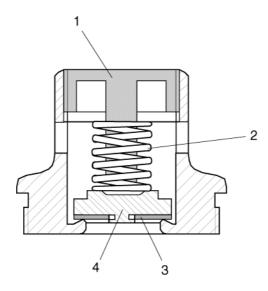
Sectional view of the safety valve, for legend see Table 8
